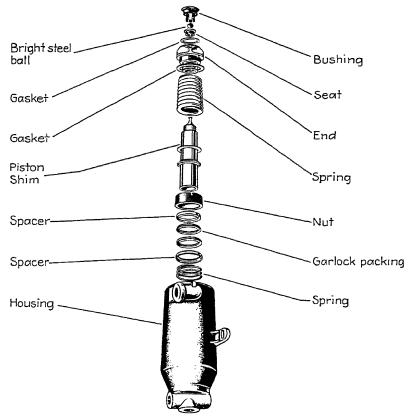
Valve assembly. Hydraulic-pressure regulating. (Courtesy of Douglas Aircraft Co.)
